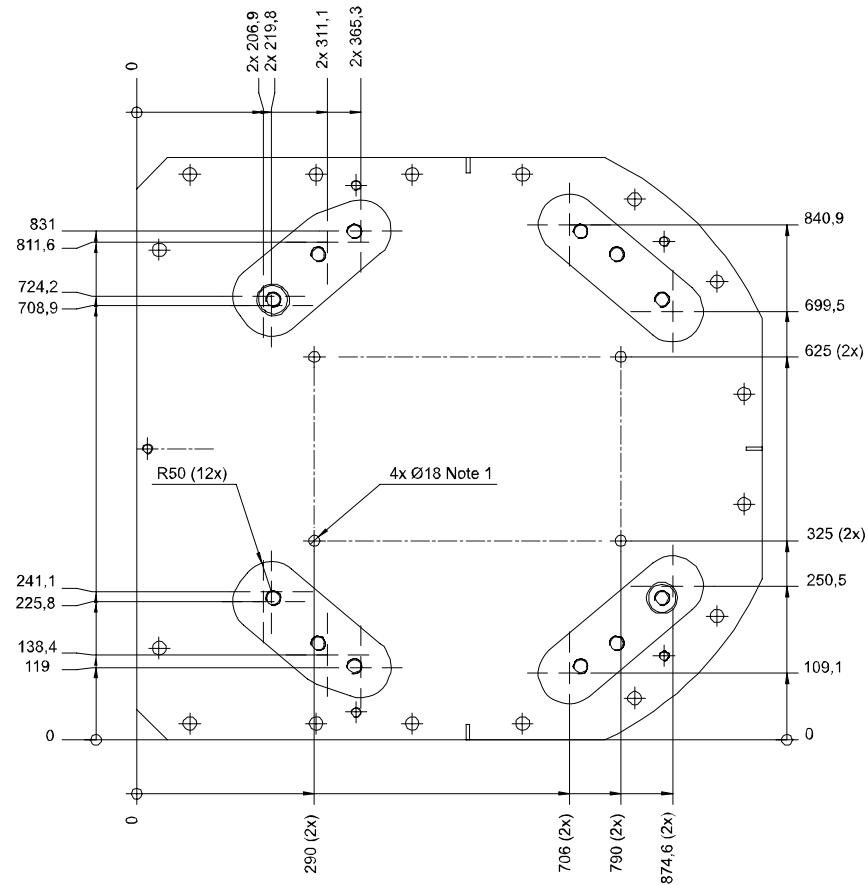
Base plate dimension print, measurements of the adaption for the robot base (dimension in mm).
